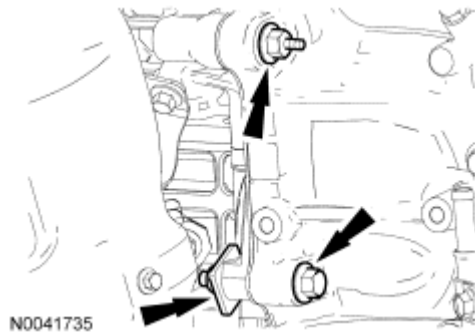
Locating Transaxle-To-Engine Stud Bolt, Bolt And Nut
